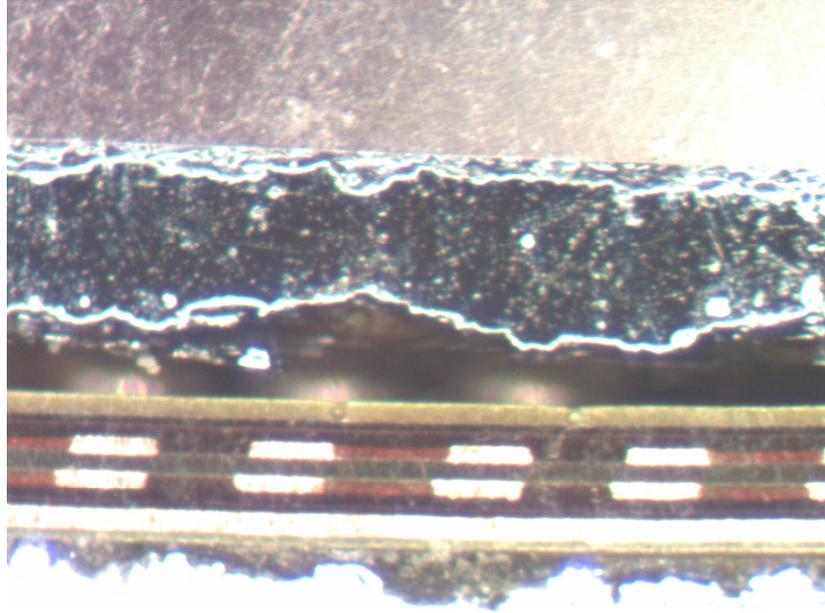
Hot Melt 1 on FLEX Test Board CSP Image
